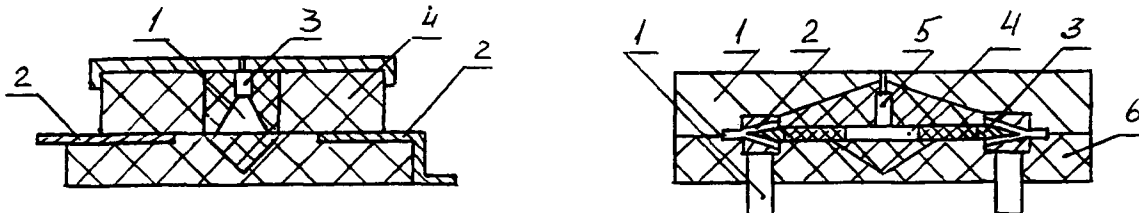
Draft of the opening switch OS2: 1-high explosive; 2-electrodes; 3-detonator; 4-body.
